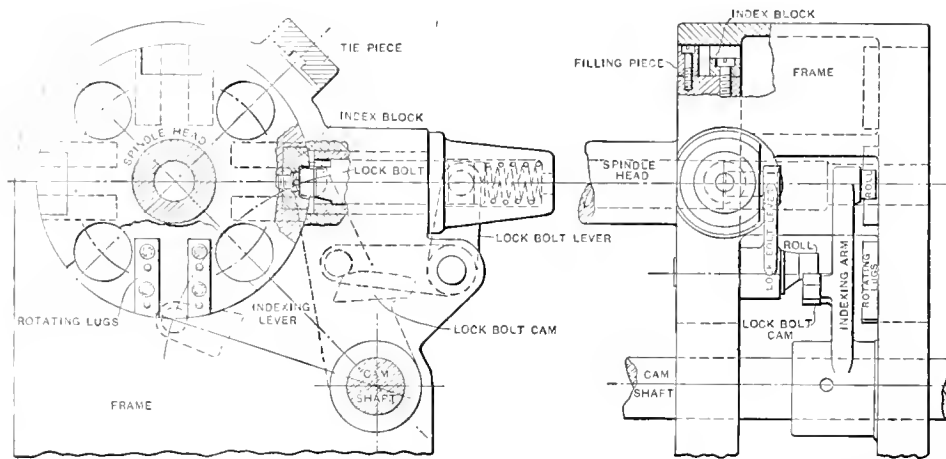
Sketch showing the Spindle Head and the Indexing and Locking Mechanism.
